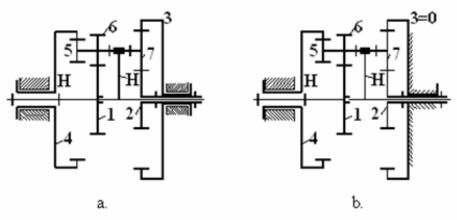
Planetary gearings:a) complex differential planetary gearing;b) the complex differential planetary gearing becomes mono-mobile
